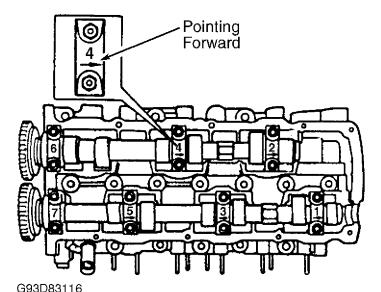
Installing Camshafts Into Cylinder Head Courtesy of Volkswagen United States, Inc.
